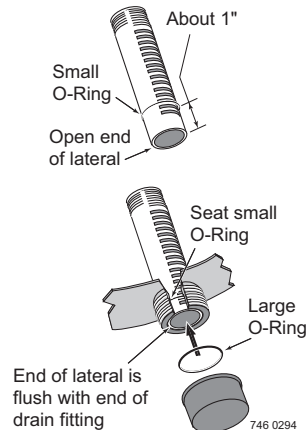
Drain Fitting Assembly. This assembly allows water to drain without losing the sand out of the filter tank.
